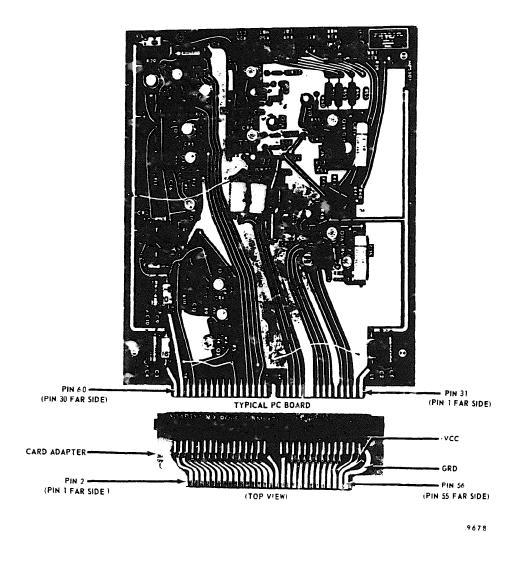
Printed Circuit Card Adapter MX-9095/USM-371 60 Pin TCU
